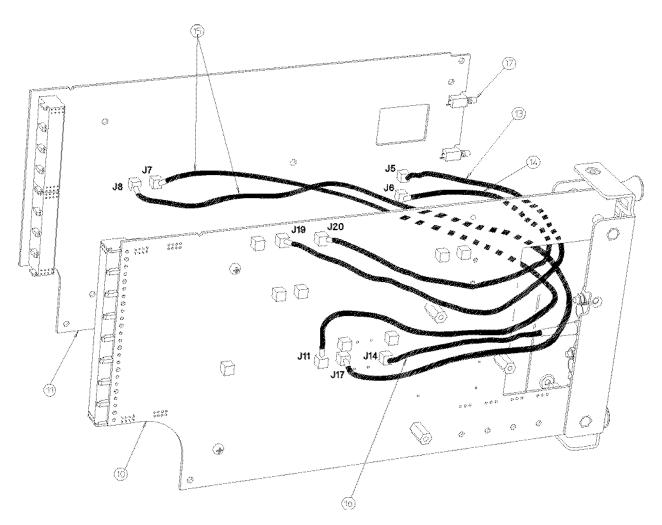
Options UKT/USN STM 1/4 Optical Module - Exploded View
